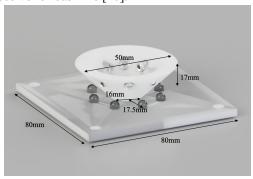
Swarmesh mechanical drawing showing the dimensions of the assembled plate and cone.
